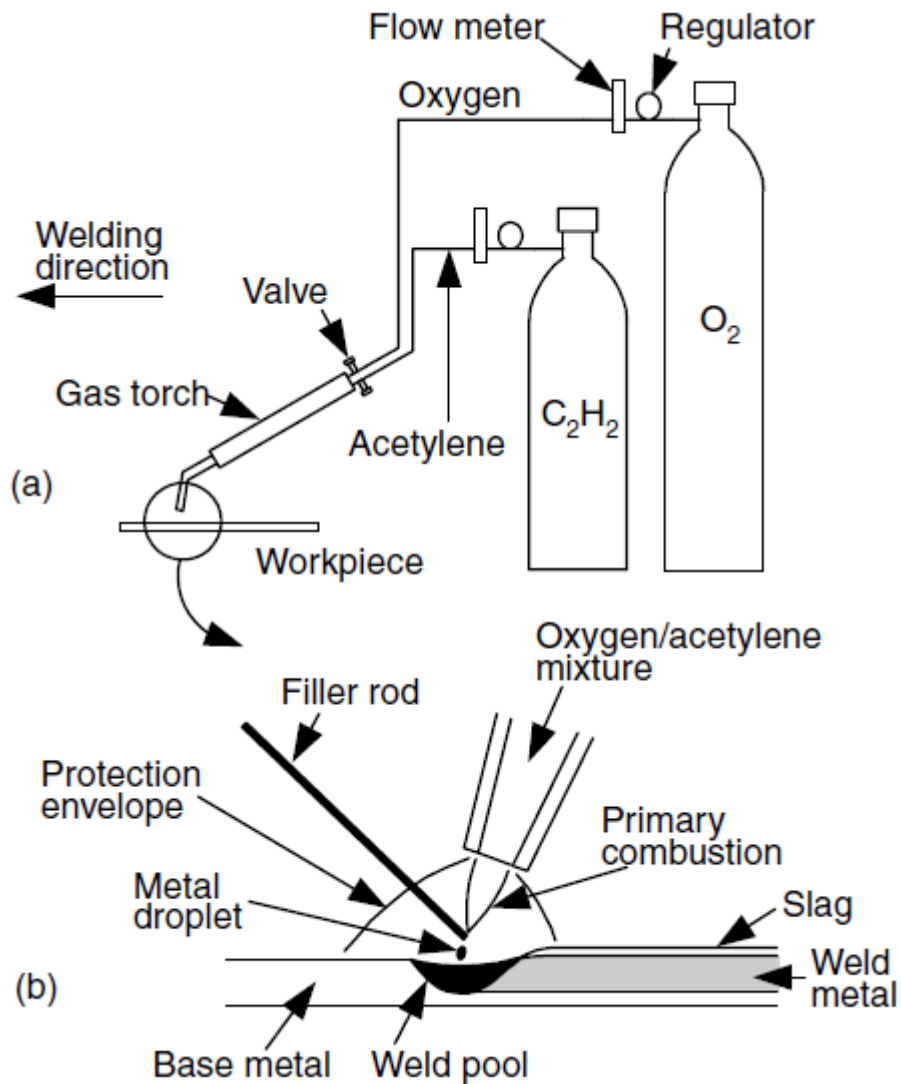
Oxyacetylene welding: (a) overall process (b) welding area enlarged [54]
